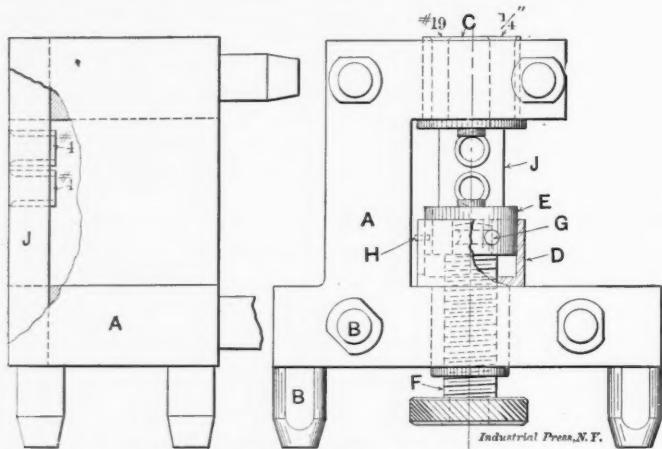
Jig for Drilling Pieces shown in Fig. 1.
